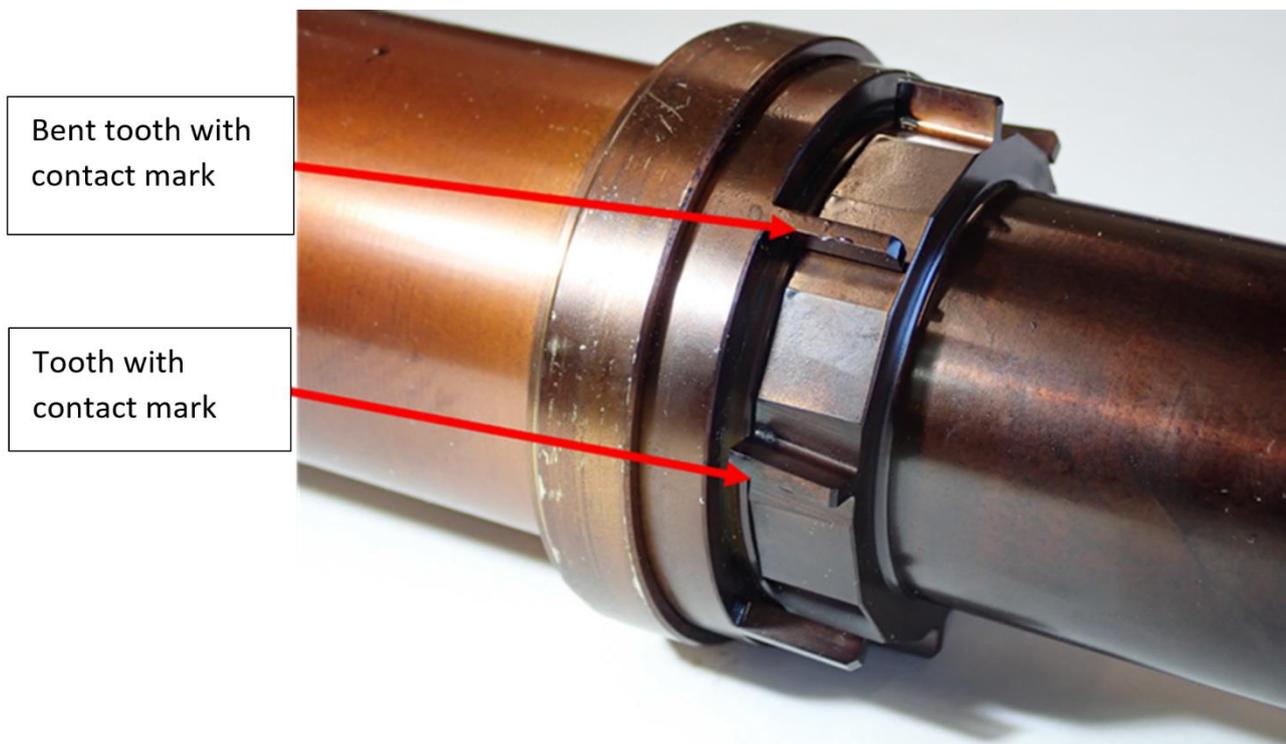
The engine's transmission shaft with contact mark and bent tooth. Photo: NSIA
